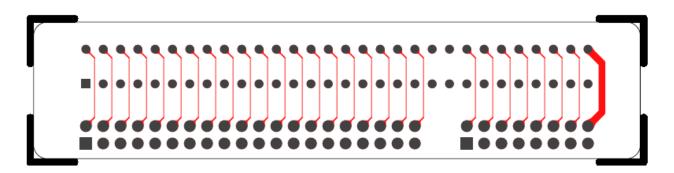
CPU-Electrode relay board: Solder Side Pattern
